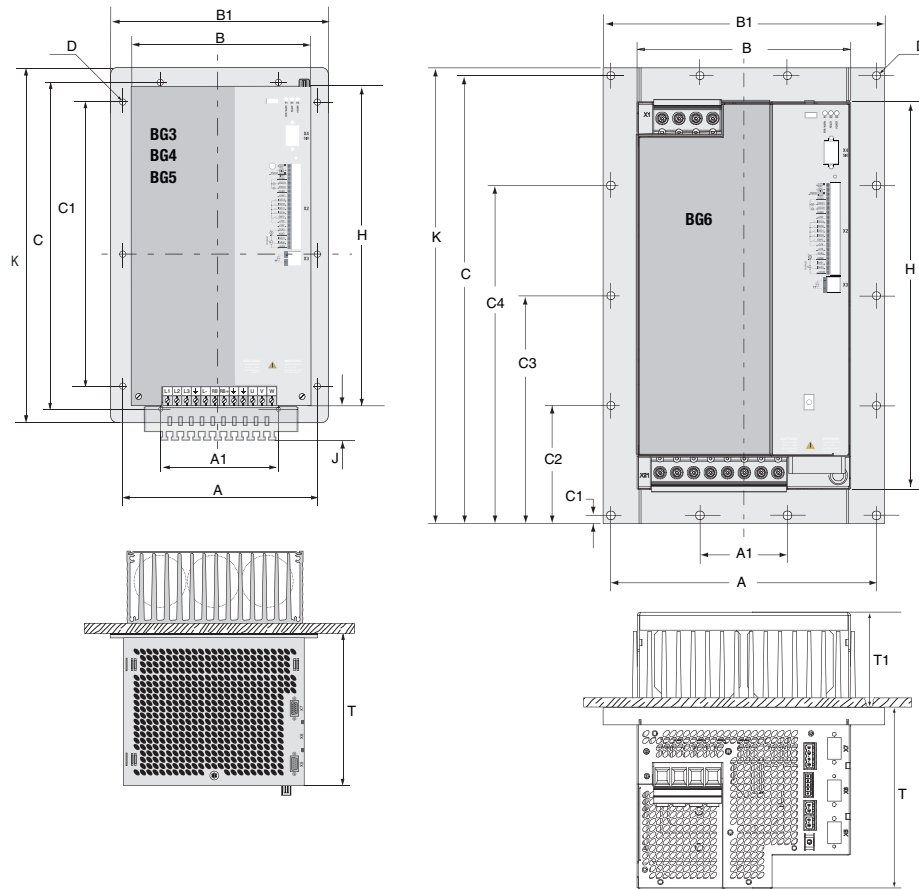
Dimensional drawings, push-through heat sink (dimensions in mm)
